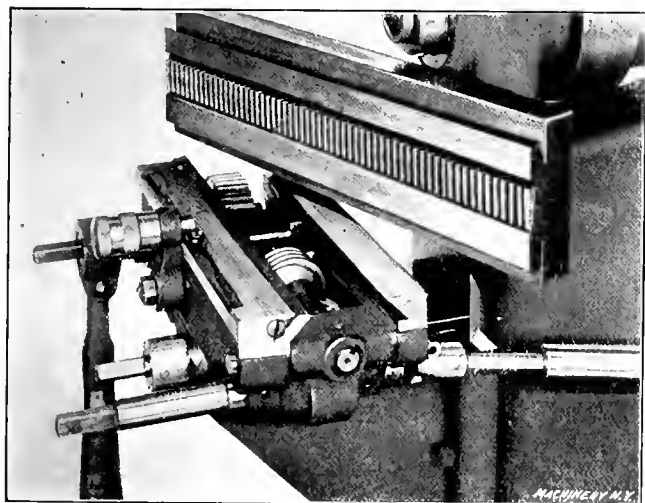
Details of the Automatic Feed and Quick Hand Return Arrangement
